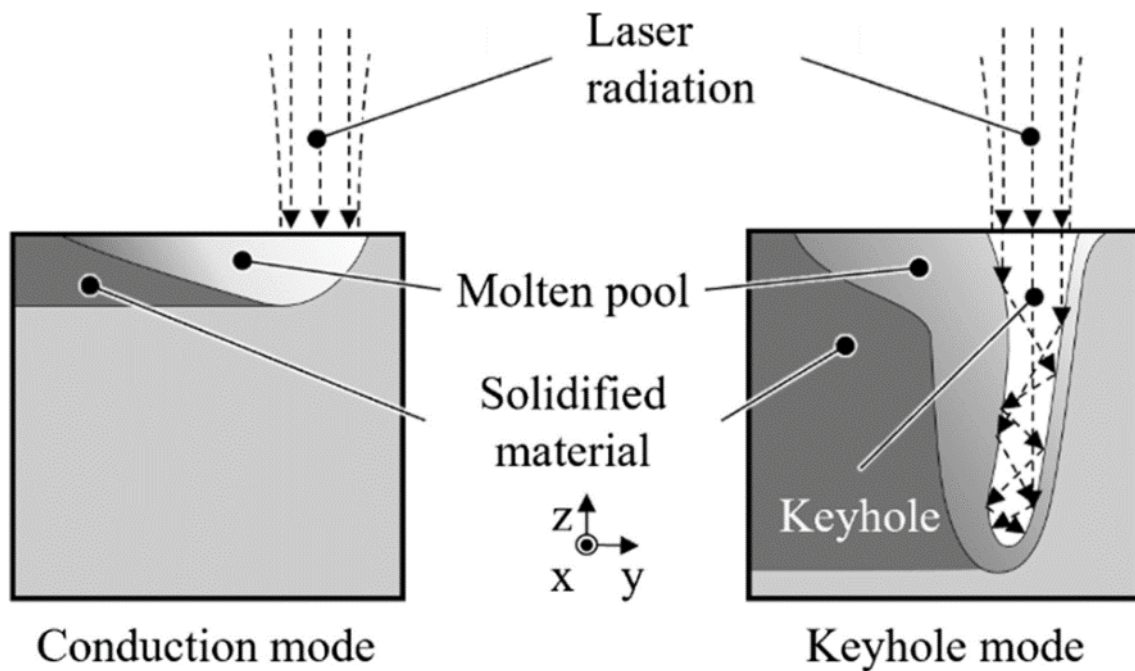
Schematic of laser welding modes. Reprinted with permission [69]. Copyright 2023, The author(s).
